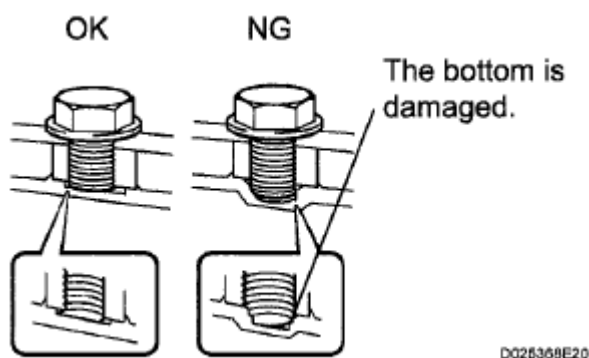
Identifying Torque Converter Bolt Damaged
